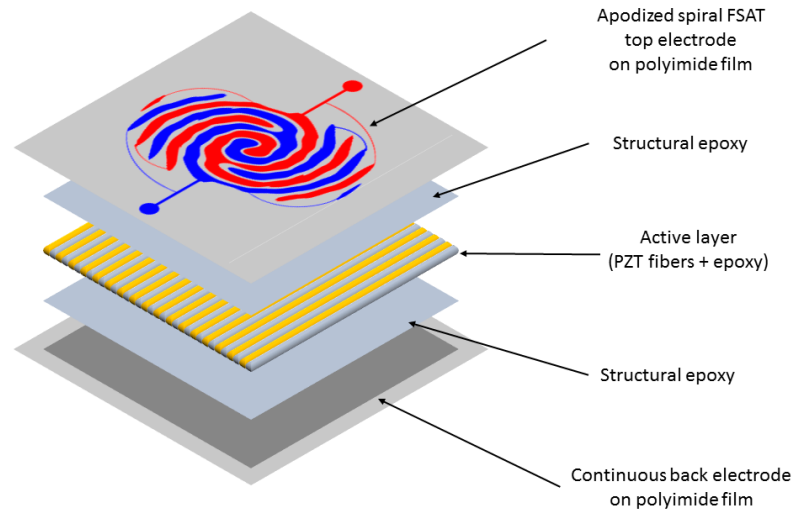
Exploded view of all the constituting layers of the apodized spiral FSAT assembly.
